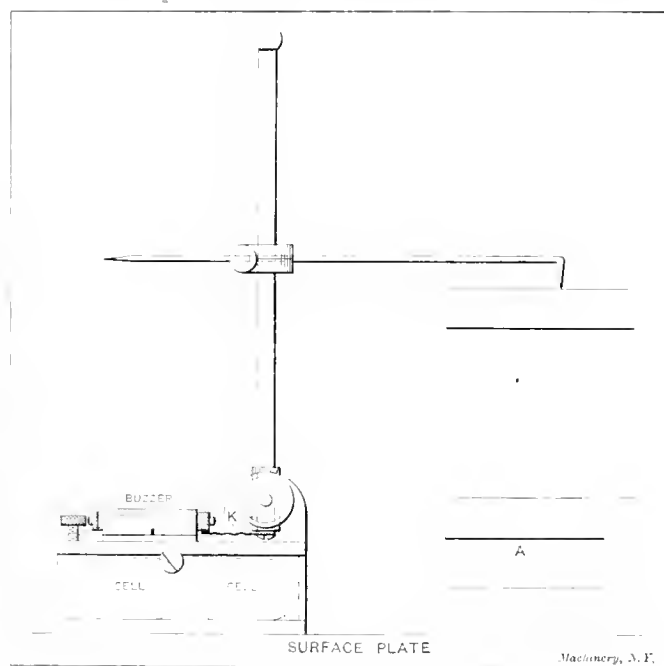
Surface Gage equipped with Electrical Apparatus for Producing Sound when the Pointer is in Contact
